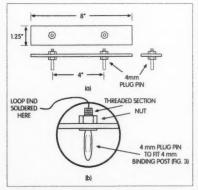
(a) Loop "plug-in" chassis. (b) Plug pin detail.
